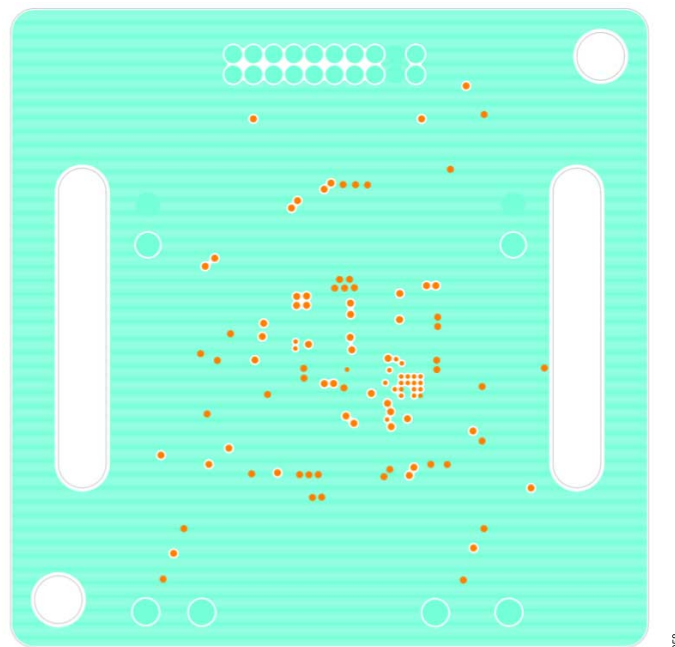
EVAL-ADPD6000Z PCB Layout: GND 1
